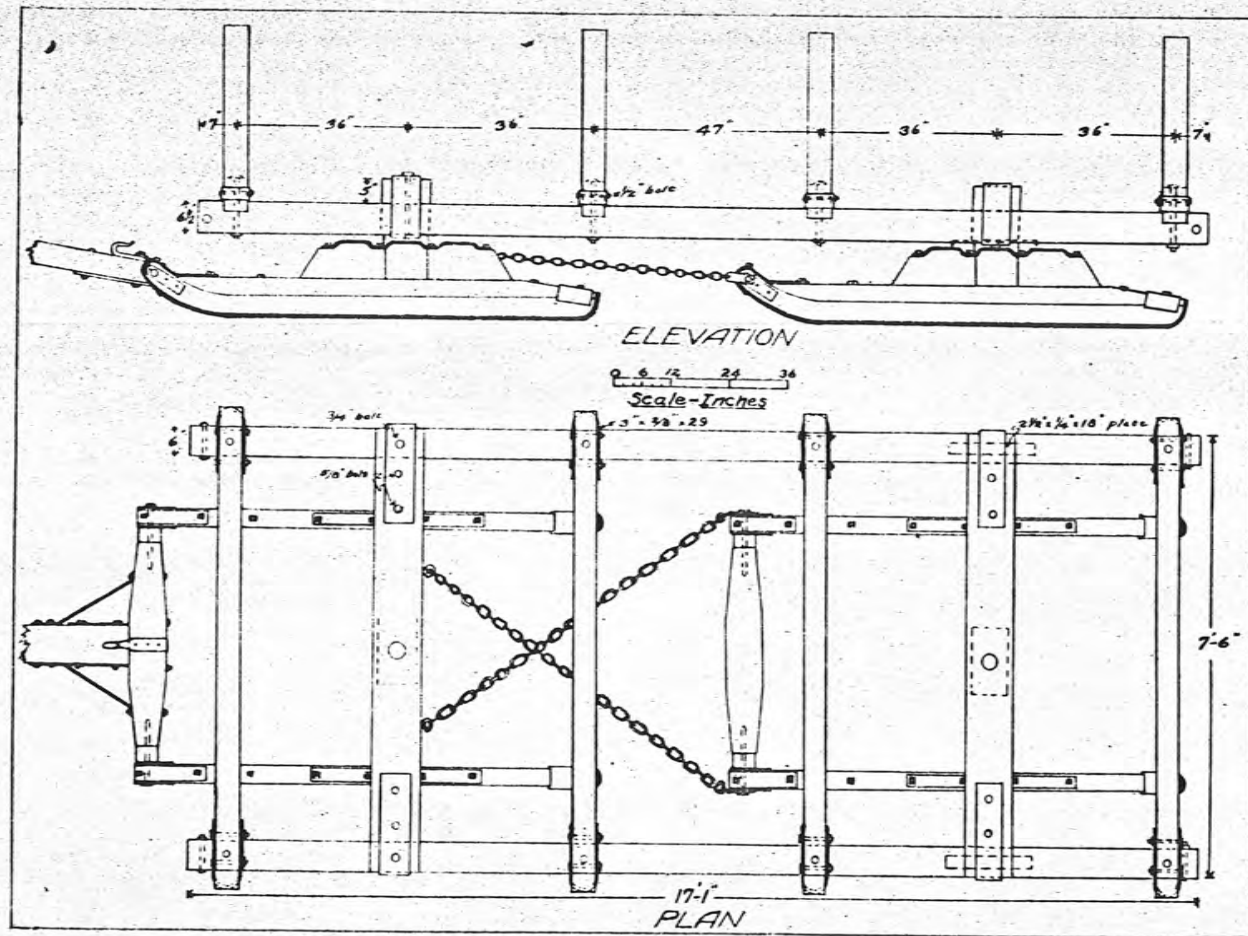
Team sleigh with typical rack for eight-foot wood.
